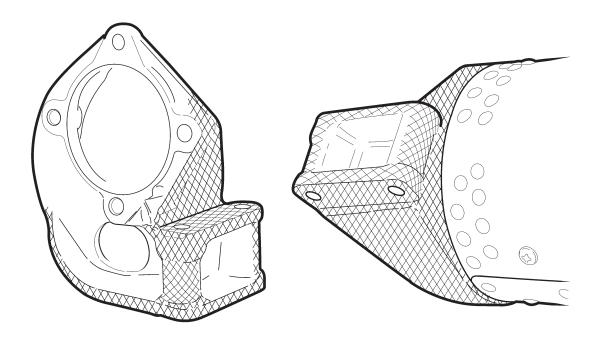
CROSS-HATCHED SURFACES OF TAILCONE'S AFT CASTING
